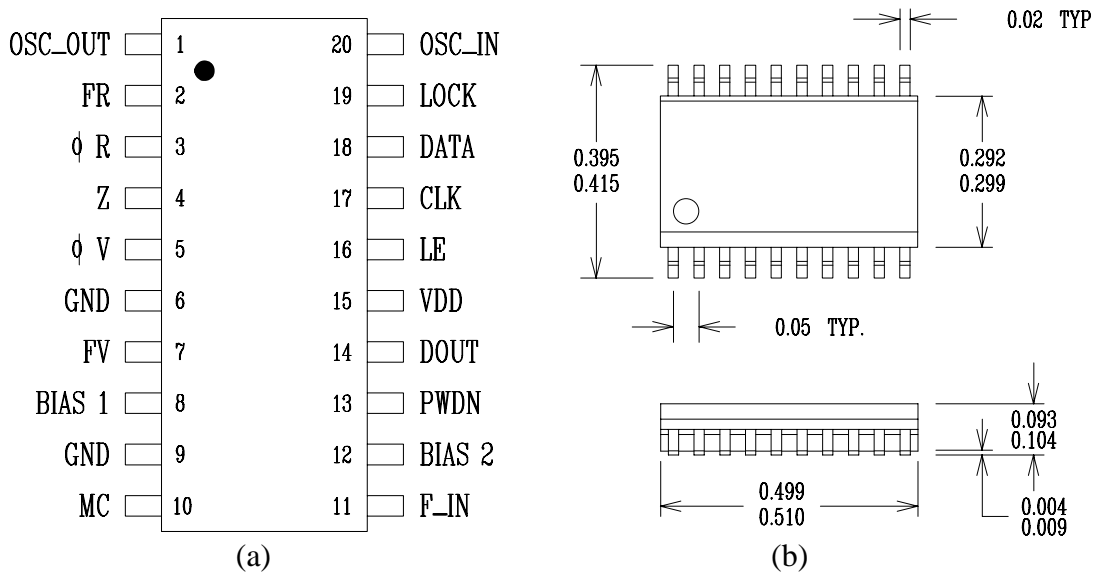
(a) device pin out, (b) package dimensions (in inches)
